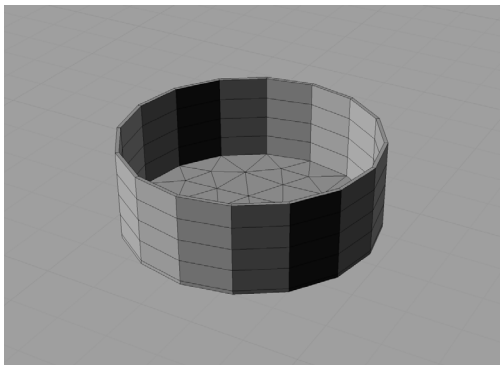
3D model of diesel engine exhaust pipe (MTU 20V956TB82)
